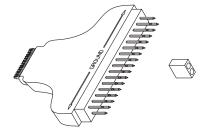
Agilent Wedge Probe Adapters for QFP Package
